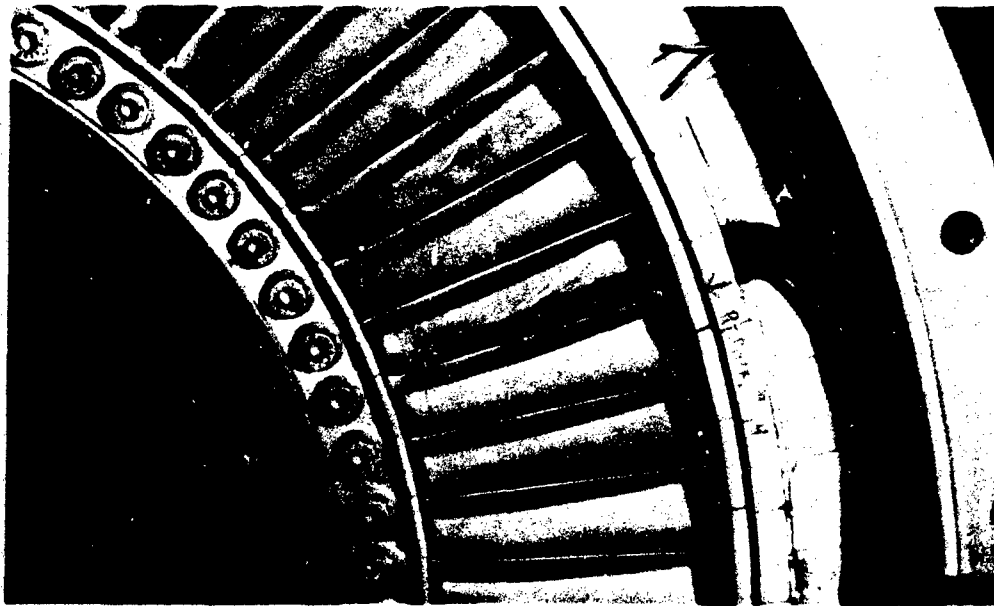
Build I, Close-Up View of Second-Stage Vane Leading Edge Temperature Kiel Heads (XPN-18911)
